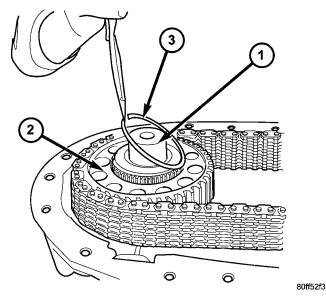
Install Front Output Shaft Sprocket Retaining Ring
